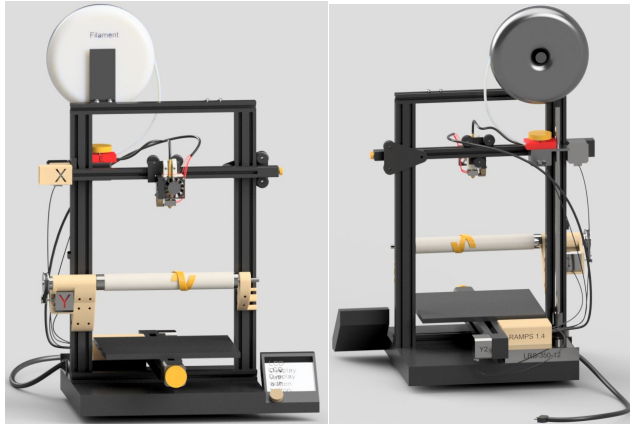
CAD model of a cylindrical 3D printer prototype created in Autodesk Fusion 360.
